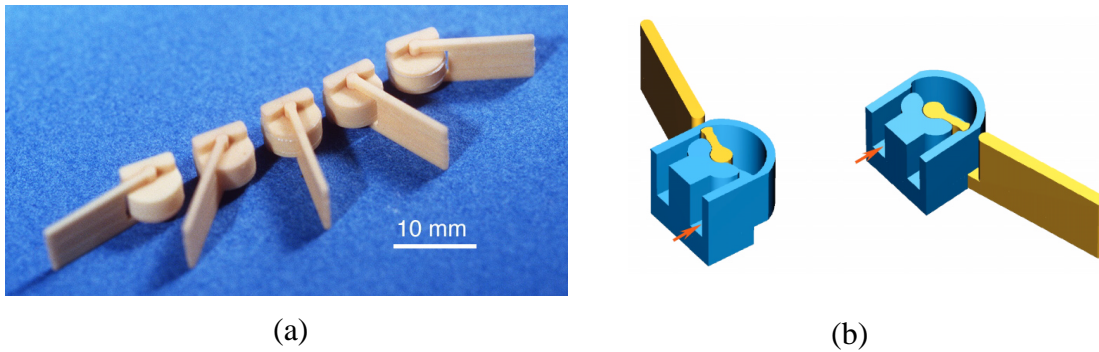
(a) Miniature trailing-edge effectors (MiTEs). (b) Actuating mechanisms.
